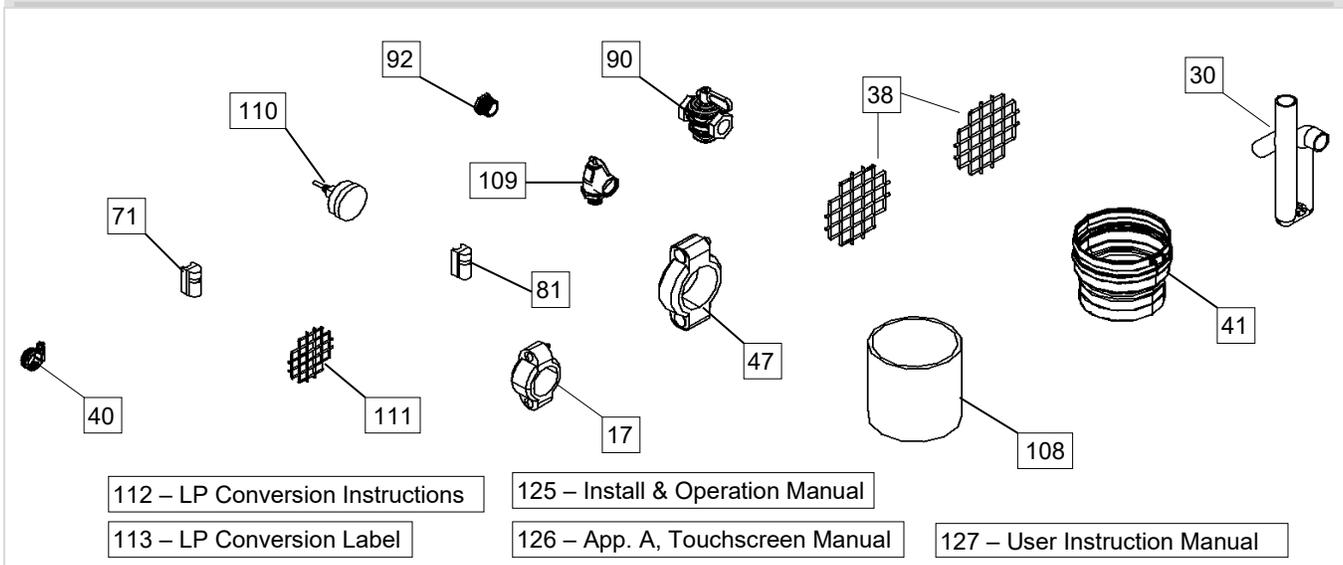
(d) Exploded View – Heat Exchanger & Gas Train
